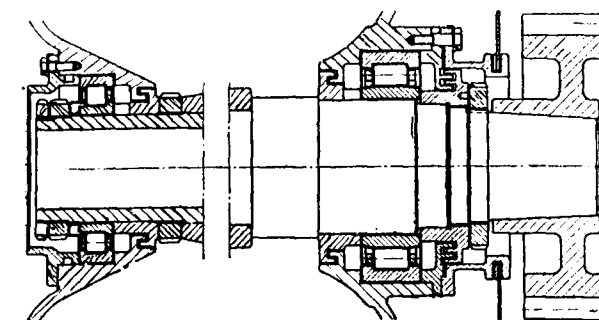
Traction motor equipped with cylindrical roller bearings.
